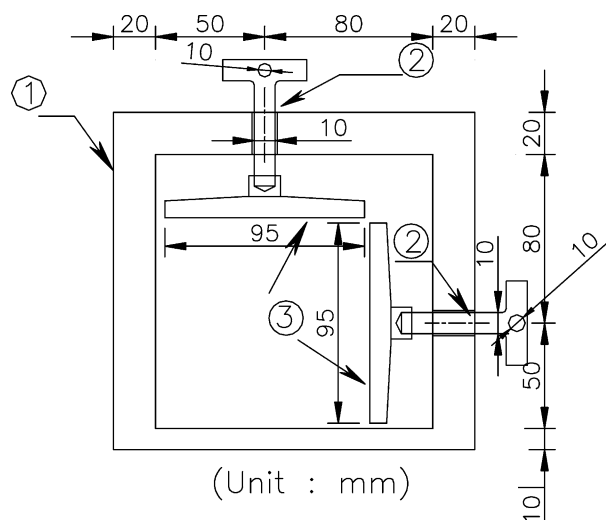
Sketch plane figure of the loading apparatus. (1) Load frame; (2) Screw; (3) Load slab.
